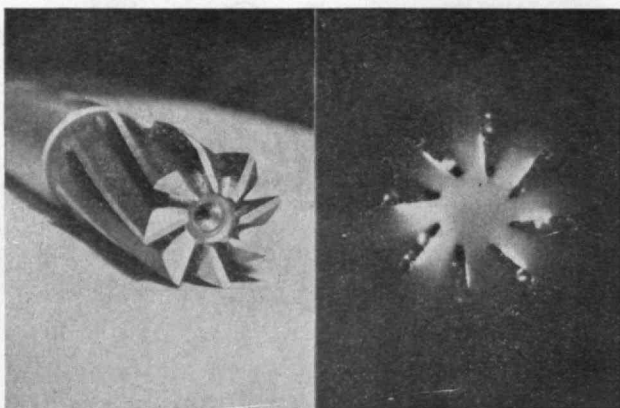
After cutting a radioactive piece of metal the cutter, (left) was placed on photographic paper to produce the image, (right) proving that metal from the workpiece had been transferred to the mill end.
